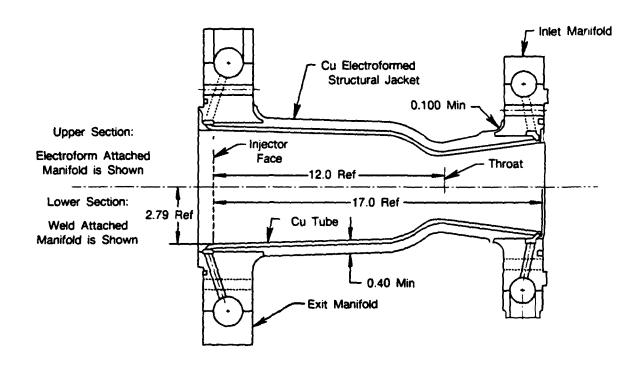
Advanced Expander Test Bed Copper Tubular Combustion Chamber
